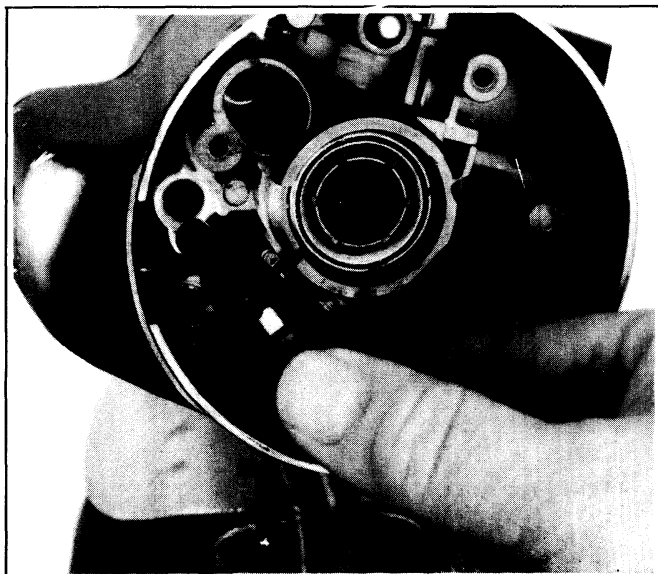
B-103--Removing Switch and Pivot Assembly - Corvette
